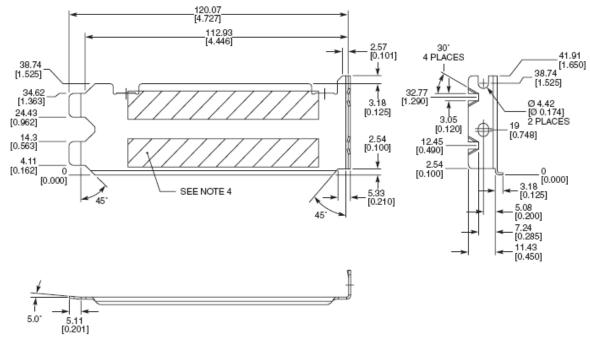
PCI Express 300 W Add-in Card Dimensional Drawing
